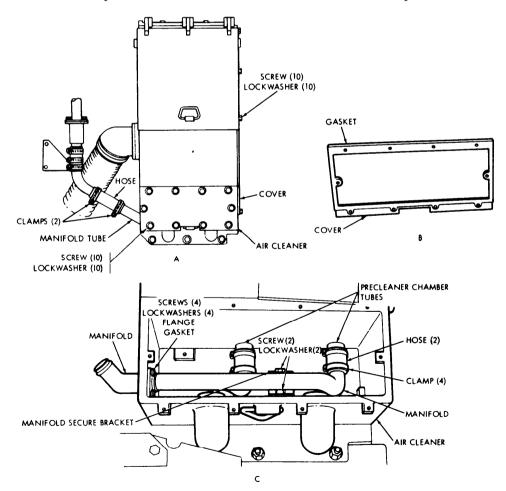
Vehicle exhaust dust ejector system (VEDES) air cleaner manifold replacement.
